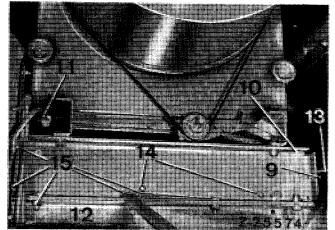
Removing Right-Hand Engine Mounting Bracket
